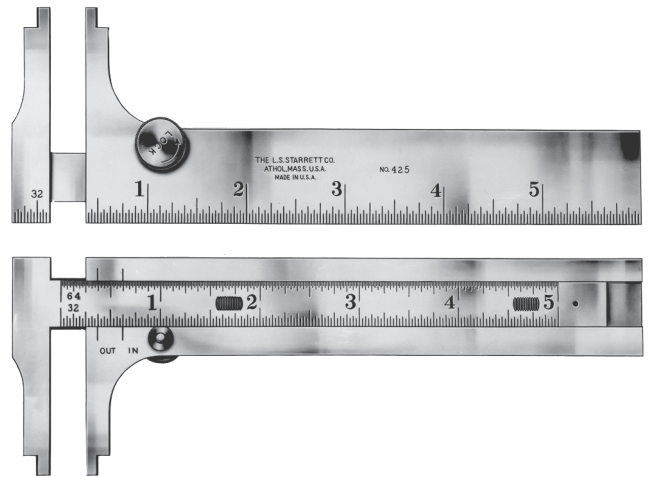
Slide caliper rule (Courtesy of The L.S. Starrett Co.).
